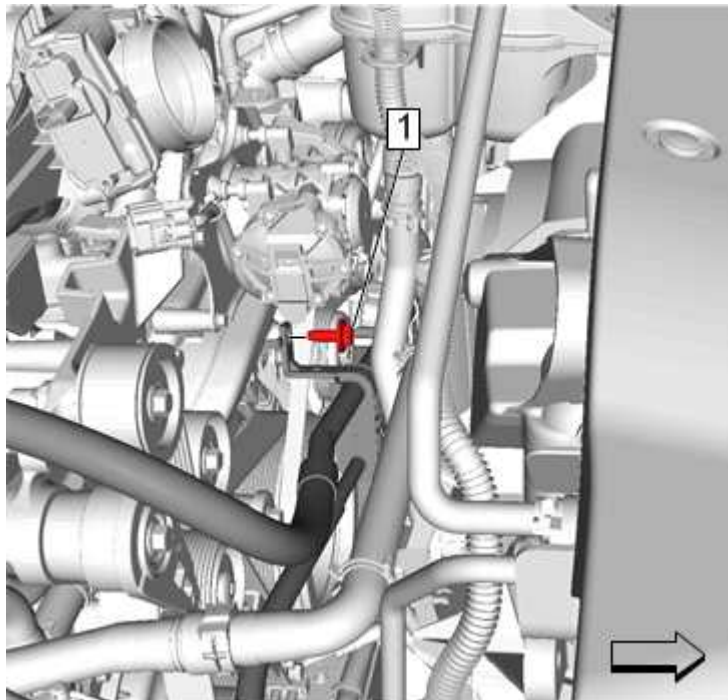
Air Conditioning Compressor Hose Bracket Bolt
